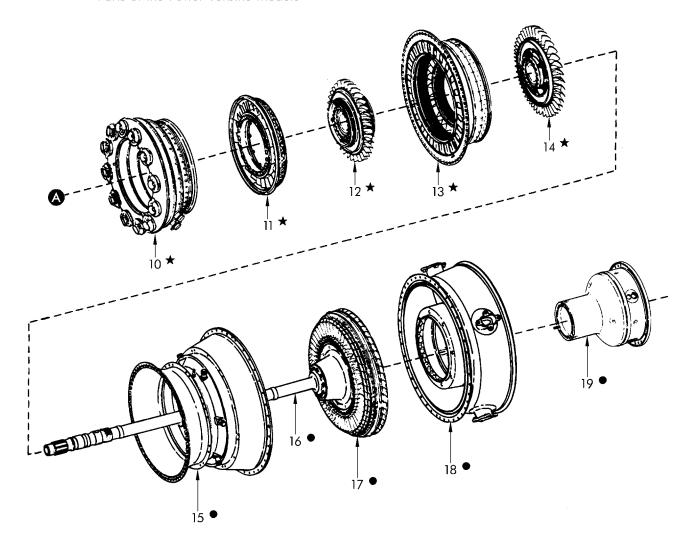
(T700) Major Engine Components (Sheet 2 of 2)
